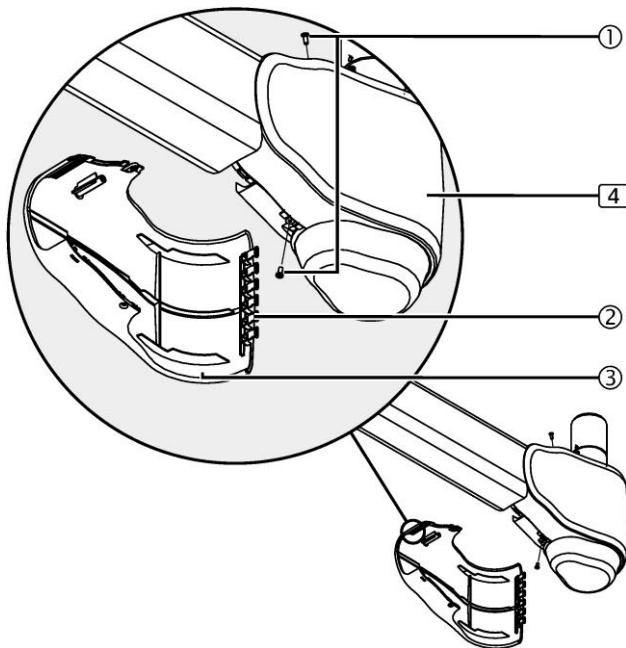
Mounting the right-hand cover panel to the Extension Arm
